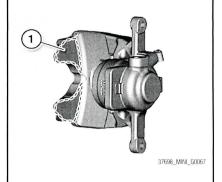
Clean contact surface of brake caliper with brake cleaner and apply a thin coating of brake pad paste
